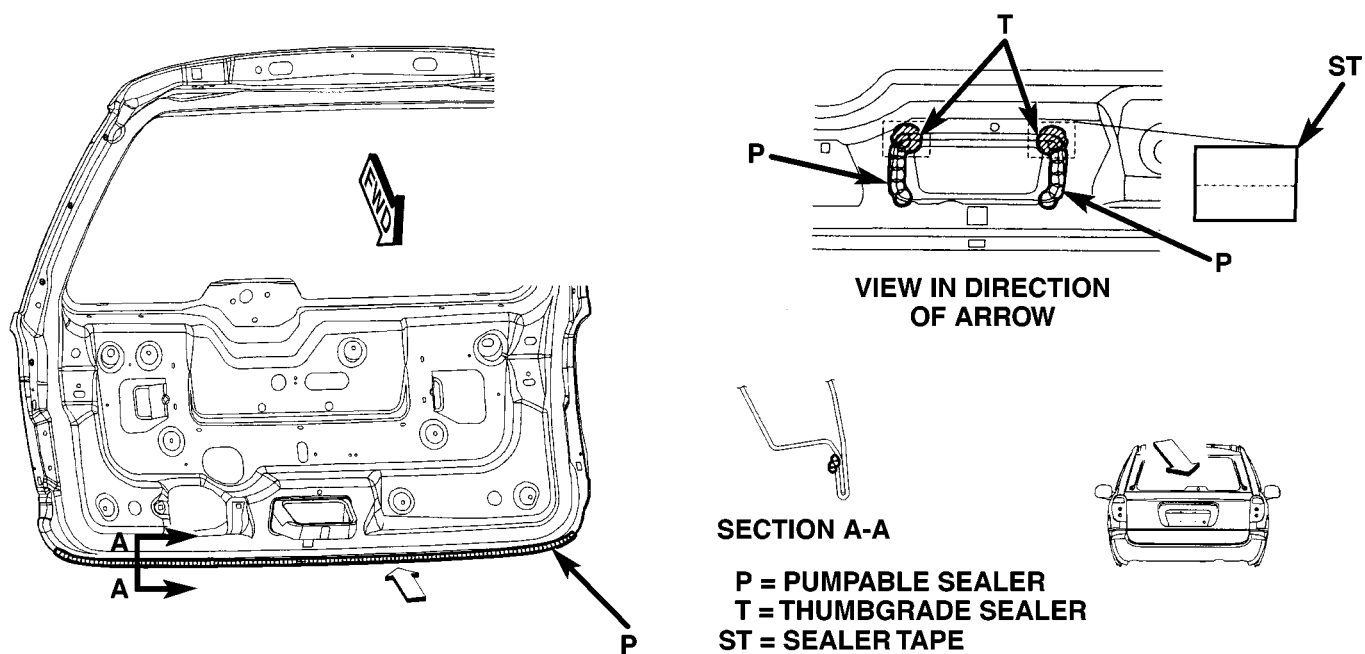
LIFTGATE HEM FLANGE AND LATCH COVER SEAMS
